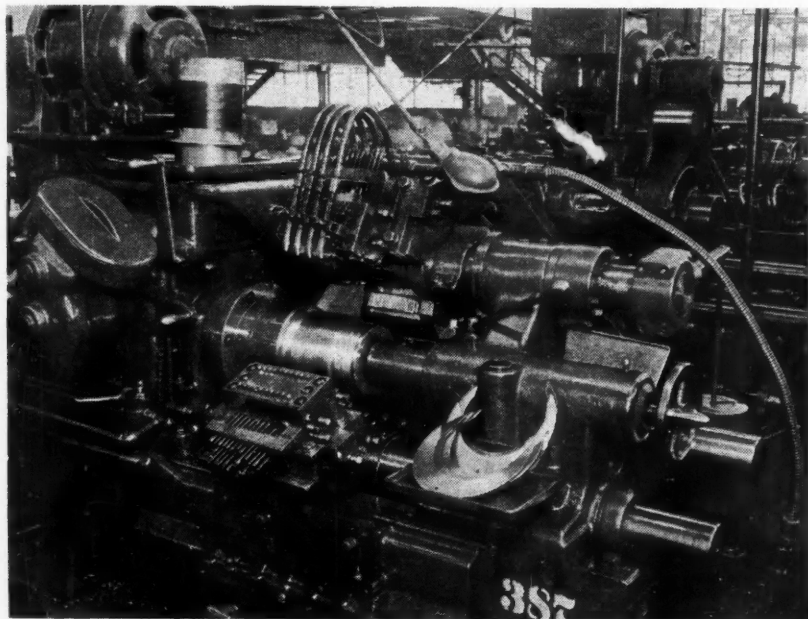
Fay automatic lathe with special equipment for cutting tooling fins on cylinder barrels. In this operation fins are grooved out of the solid steel barrel and are 0.020 in. thick when completed. Three sets of tools are used, one each for cutting sides of the fins and a third for turning out center portion between fins.
